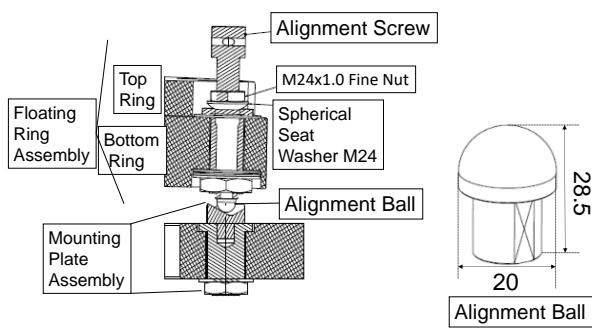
Left: Cross section of Alignment screw fitted through the 'Floating Ring' Assembly and the 'Mounting Plate' Assembly. Right: Alignment Ball. Dimensions in millimetres.
